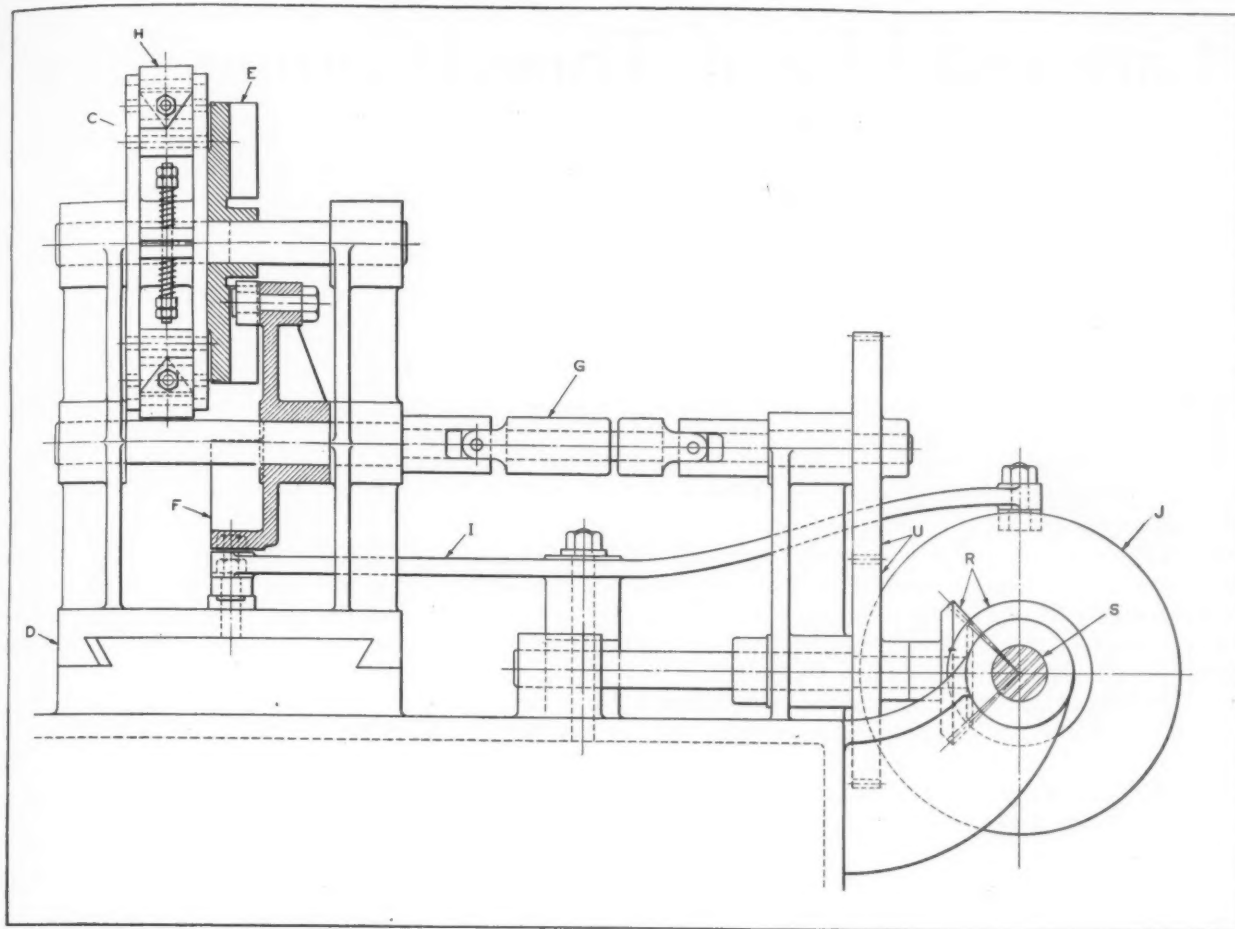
Front Elevation View of Transfer Mechanism of Chain Making Machine
